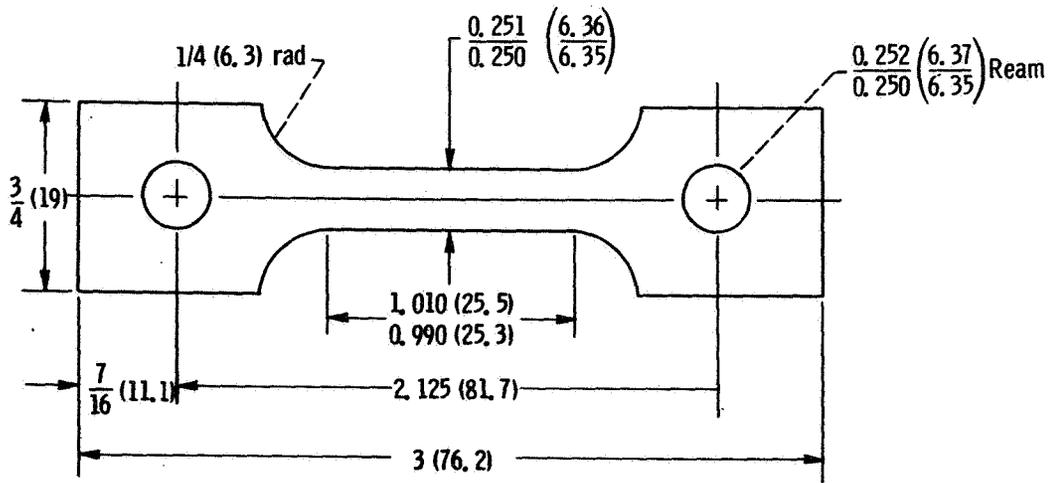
Specifications for tensile test specimens. (All dimensions in inches (mm).)
